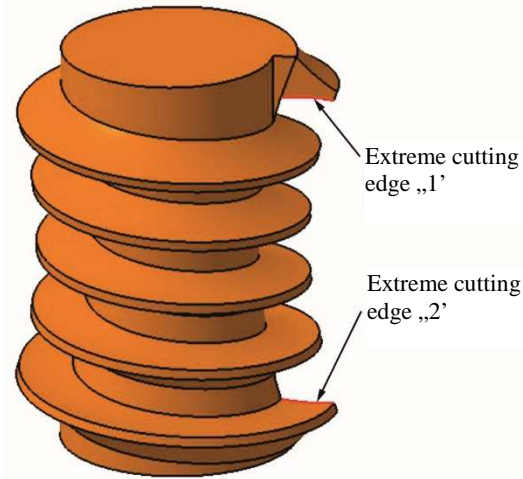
Illustrative figure of worm hob model with marked cutting edges generating a part of tooth side of worm wheel
